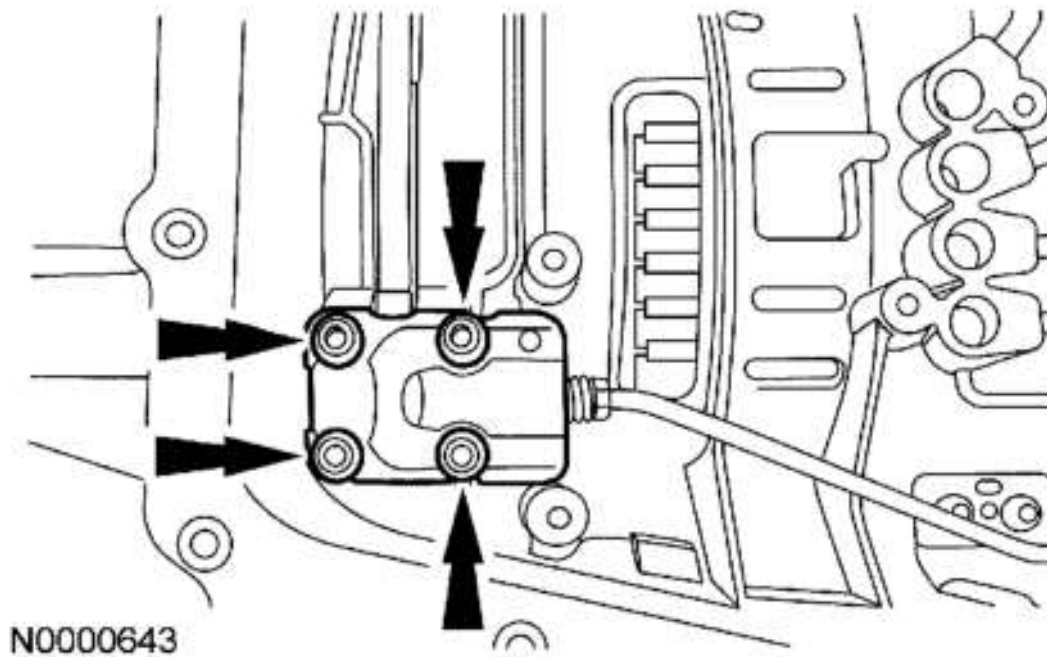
Installing New Manual Control Lever Shaft Seal
